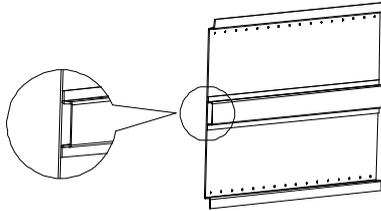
Weld a transverse reinforcement beam on the back of the backplane.
